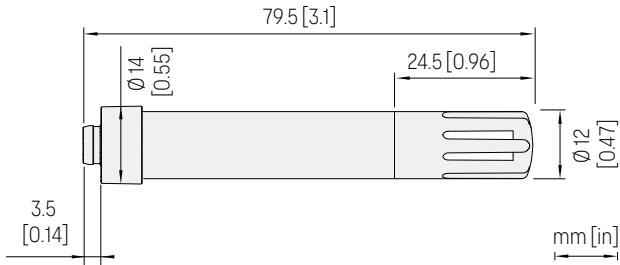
HMP63 and HMP113 dimensions in mm [in]
